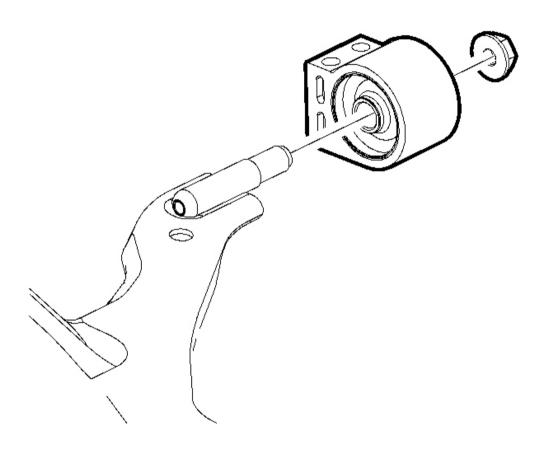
Rear Bushing & Nut Courtesy of GENERAL MOTORS CORP.
